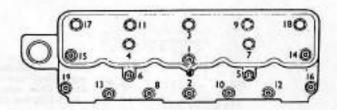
Sequence for tightening head bolts on elx cylinder engines. Tighten in even steps until 136 N·m (160 ft.-lbs.) torque is reached. See Fig. 53.
